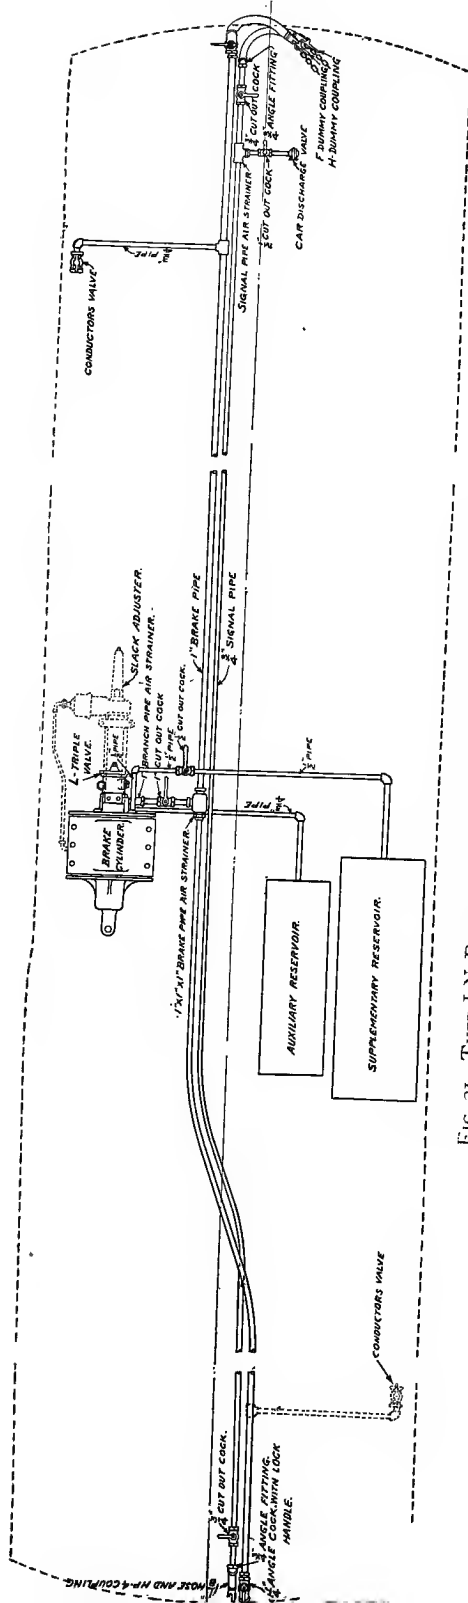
TYPE LN PASSENGER CAR BRAKE EQUIPMENT DIAGRAM.
